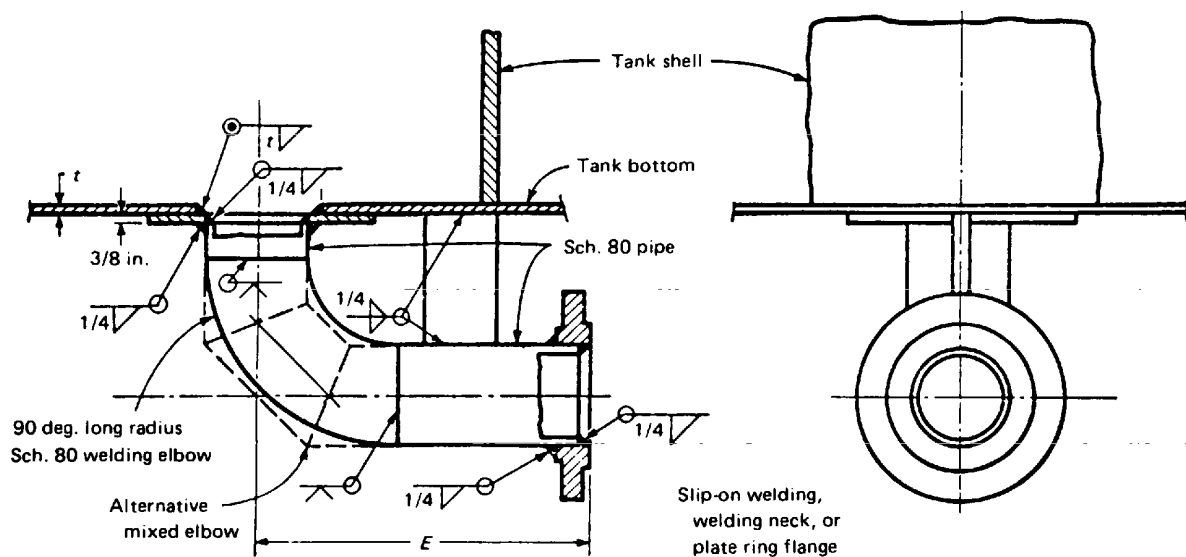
WELDED BOTTOM OUTLET ELBOW
